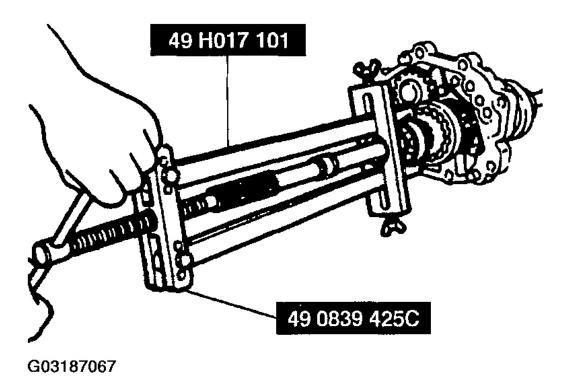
Removing Mainshaft Rear Bearing Courtesy of MAZDA MOTORS CORP.
